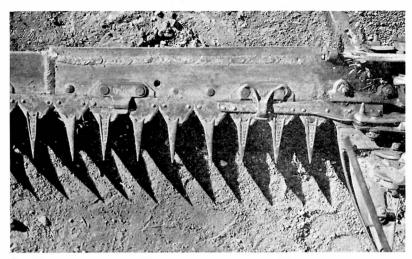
Two foot extension welded on inner end of cutter bar. This practice is recommended only when a good job of arc welding is possible.
